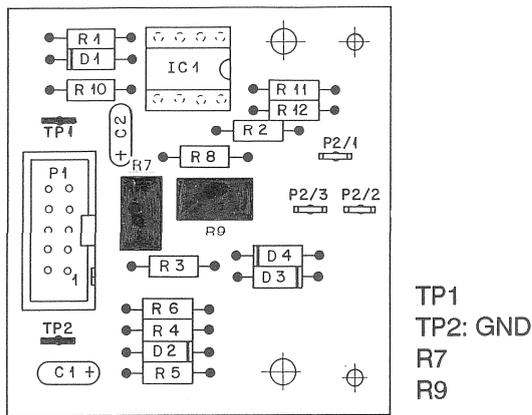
Tape Tension Sensor Board 1.820.772.81
